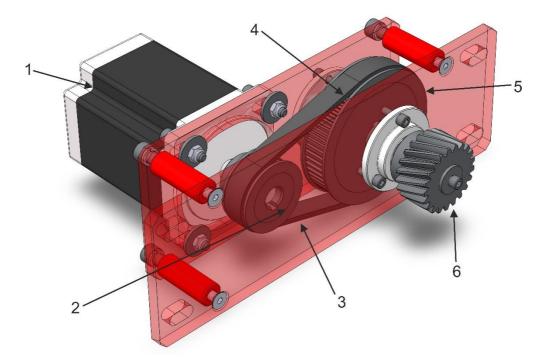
The proposed design of the drive for the horizontal movement of the robot: 1 - the shaft of the electric motor, 2 - key, 3 - the drive pulley, 4 - belt transmission, 5- larger (driven) pulley, 6 - helical gear.
